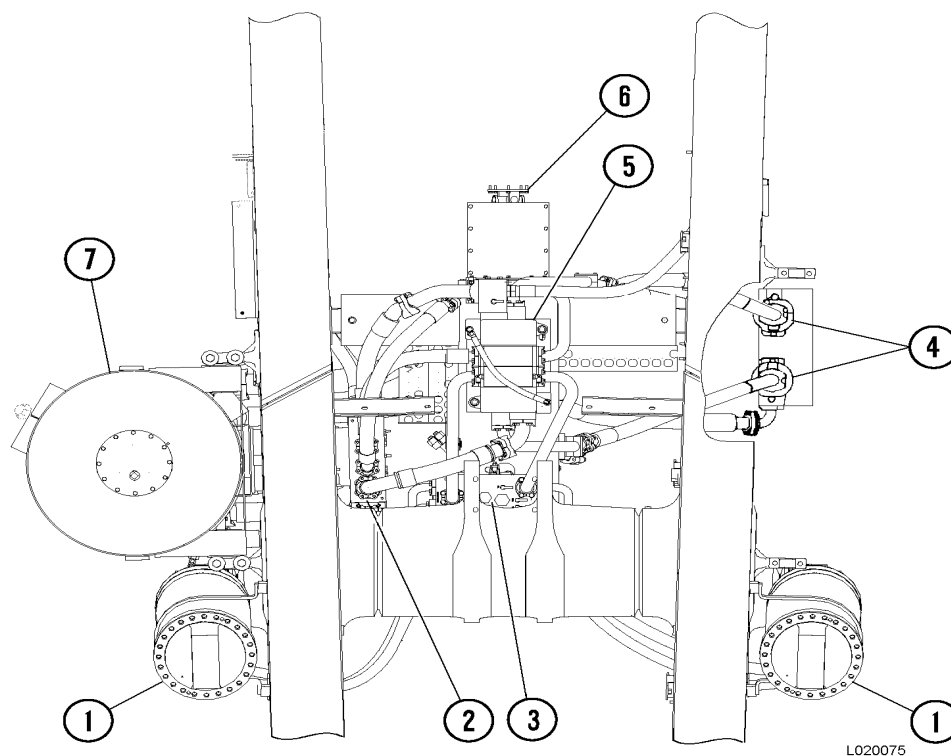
HOIST VALVE & PIPING (Top View)
